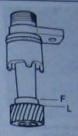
Manual gearbox lubricant level markings on speedometer
